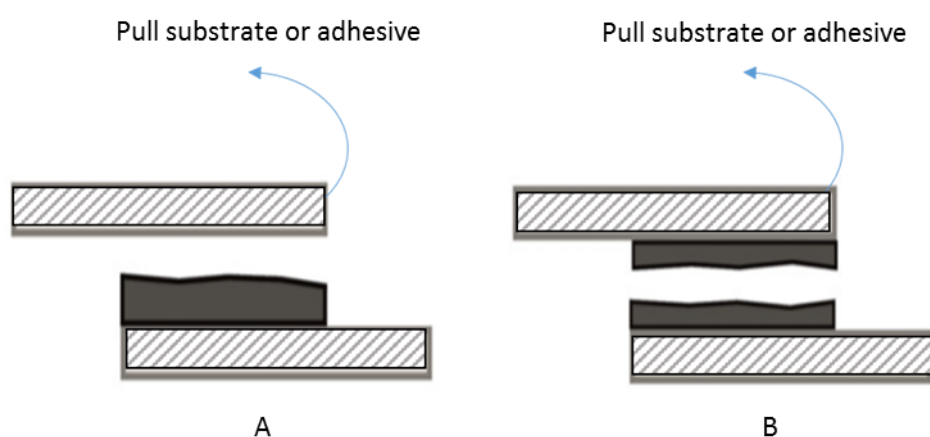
Fracture pattern after peel off test: (A): adhesive fracture, where the adhesive remains on the substrate, (B): cohesive fracture, where the adhesive matrix breaks.
